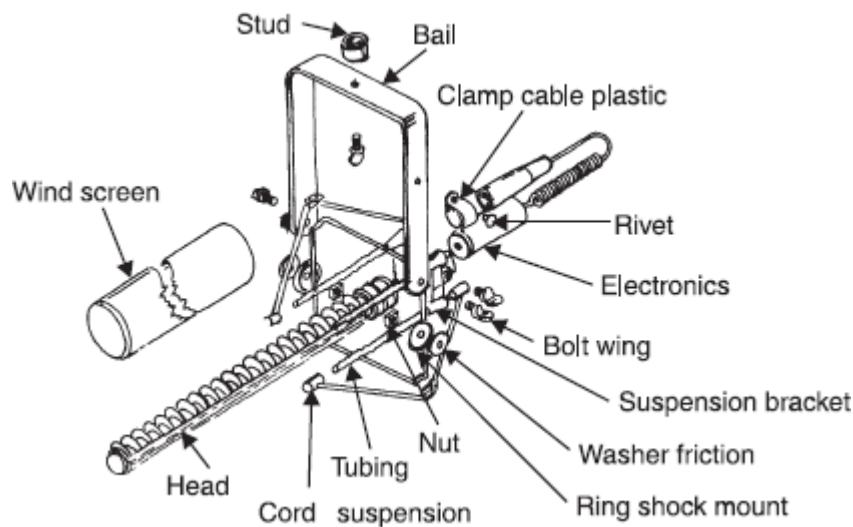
The shotgun condenser microphone. Electro-Voice CL42S assembly exploded view
